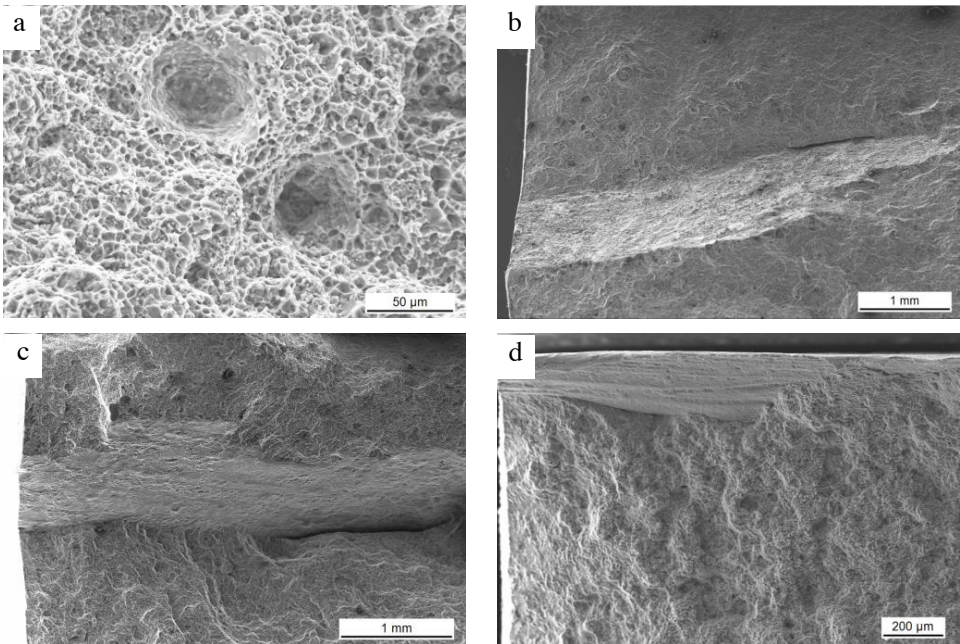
Observed casting defects: a) gas porosity, b) cold flake, c) cold shut and d) lamination.
